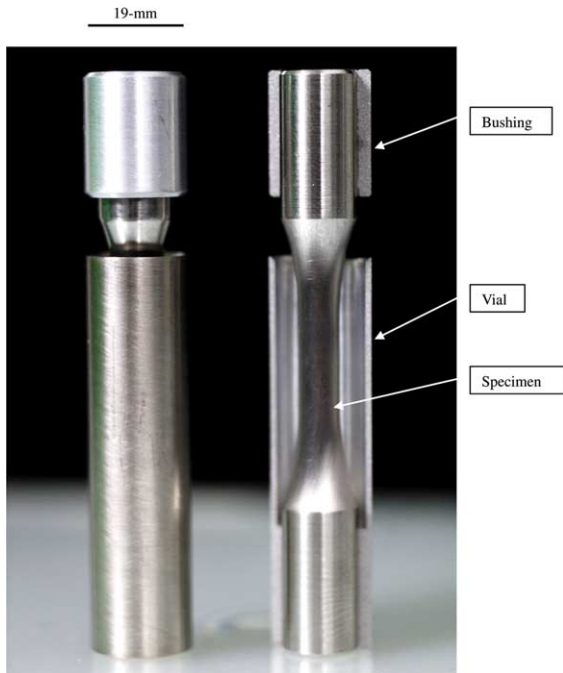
ORNL fatigue specimen with bushing and vial for containment of mercury.
